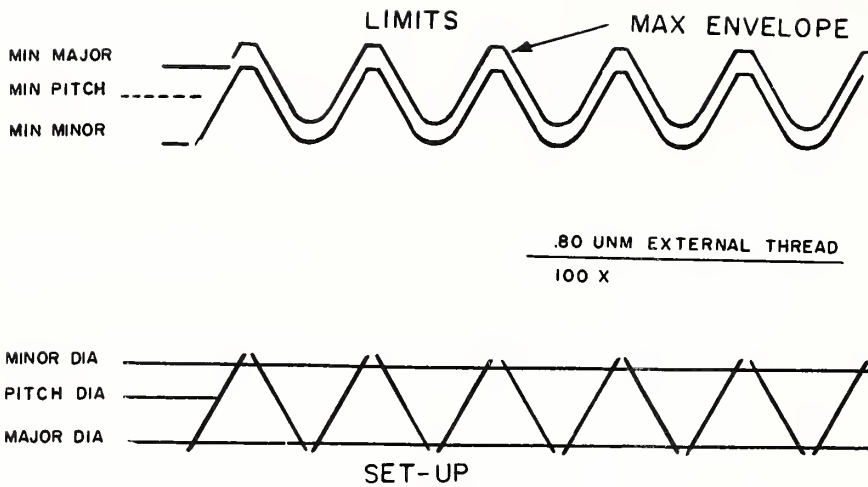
Suggested chart for projection inspection of external Unified Miniature threads, UNM.
